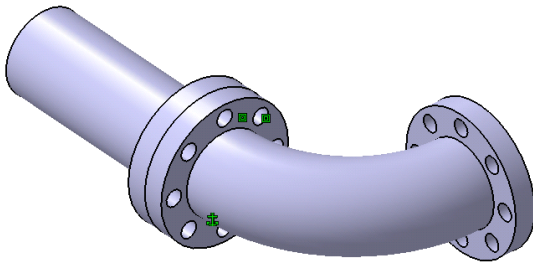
Contact constraint to be replaced by the Offset constraint
